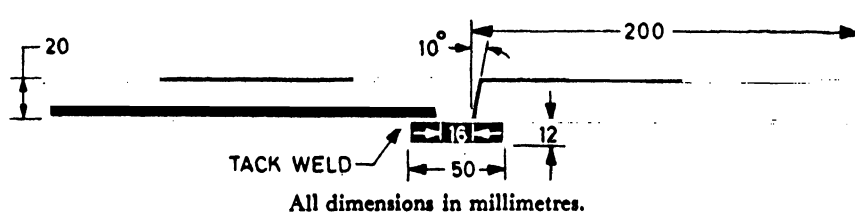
DIMENSIONS OF ALL-WELD METAL TEST ASSEMBLY
